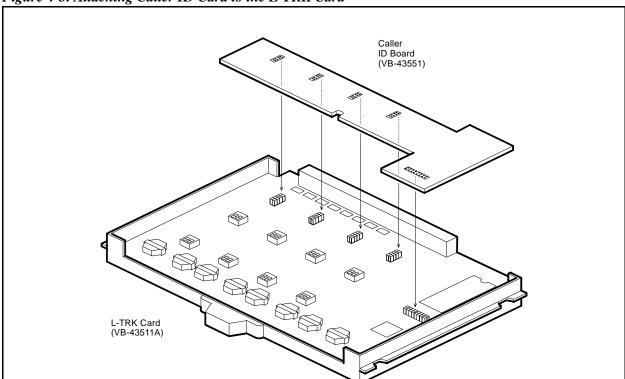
Attaching Caller ID Card to the L-TRK Card
